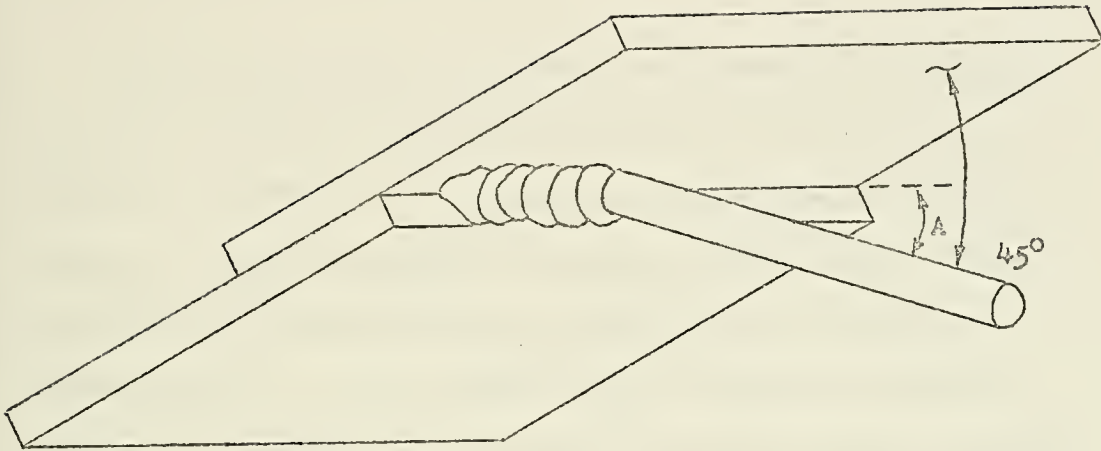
SELF-CONSUMING TECHNIQUE FOR UNDERWATER SHIELDED METAL-ARC WELDING OF VERTICAL FILLET WELDS
